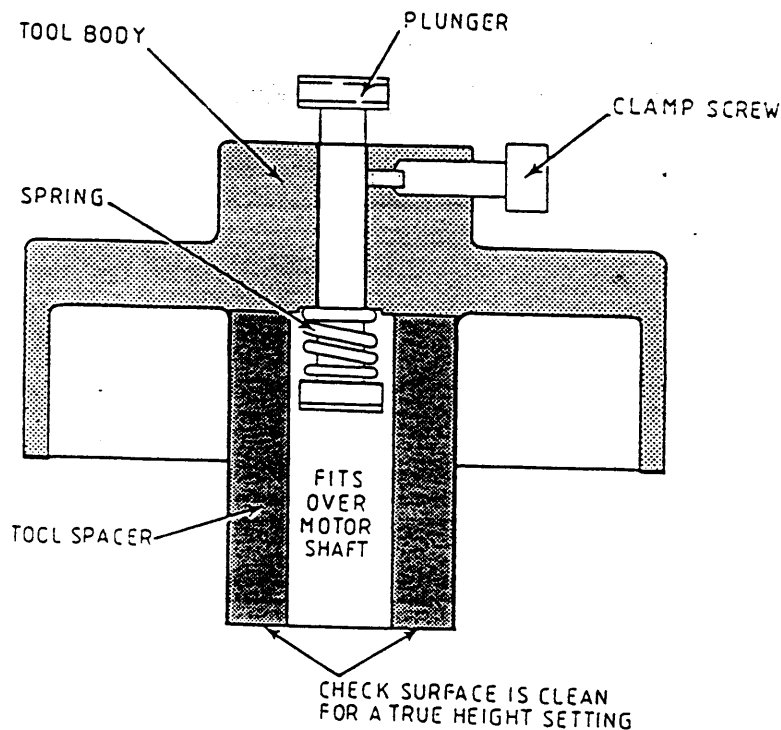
SUPPLY HUB HEIGHT SETTING TOOL T6009
